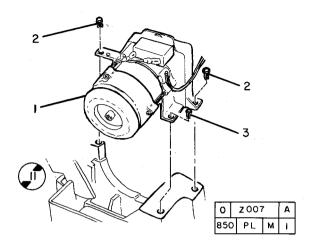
Entire Drawing Without Tag Symbol.(0z007a)
